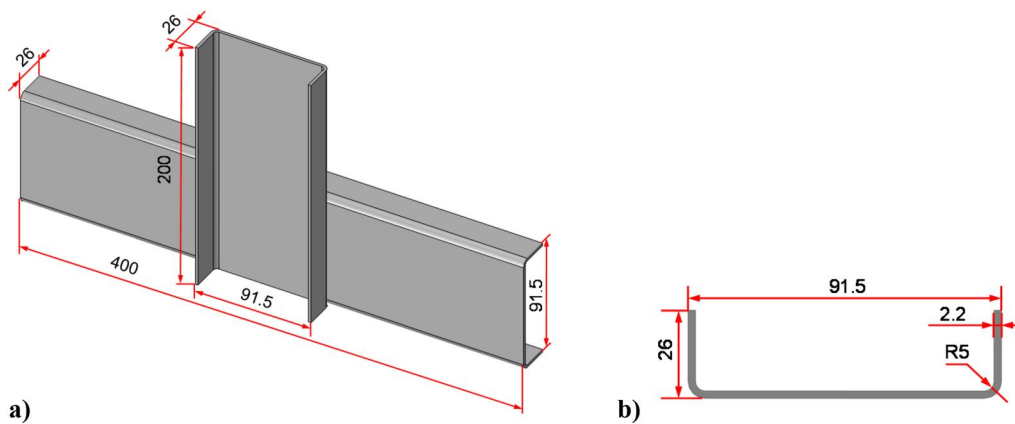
Specimen dimensions: (a) isometric view; (b) cross-section of C-profile (dimensions in mm).
